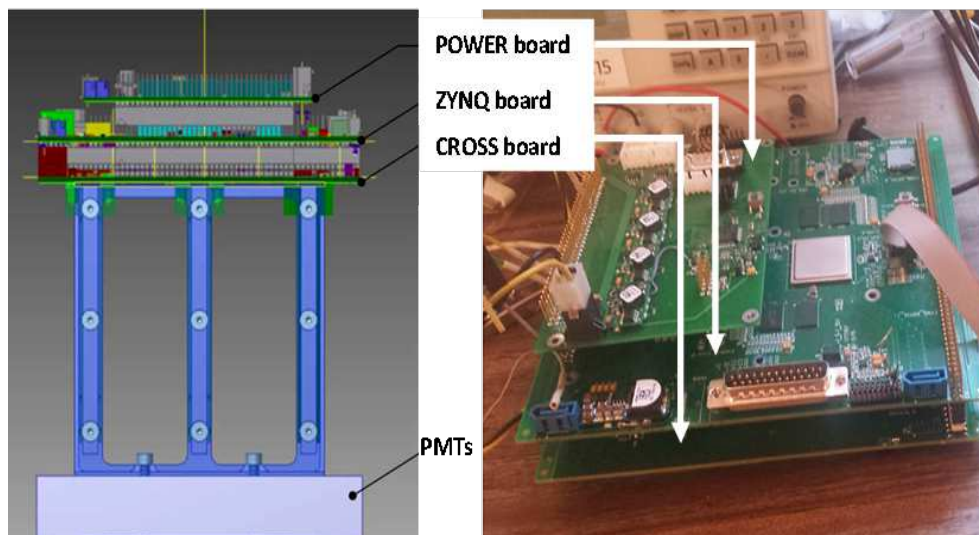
CAD modeling of a part of the Mini EUSO mechanical structure (left). Picture of the Power Board, ZYNQ Board and Cross Board, assembled in a PCBs compact block (right).
